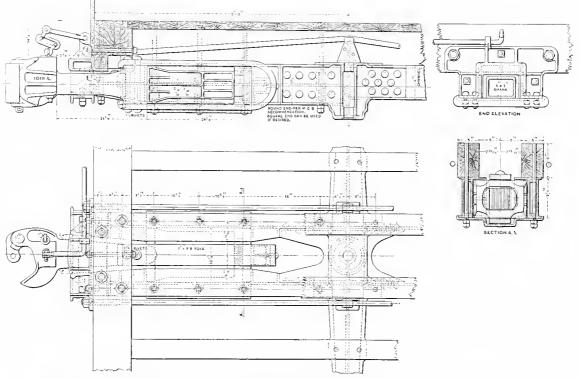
Cast Steel Bolster and Channel Draft Beams. Gould Coupler Co.
